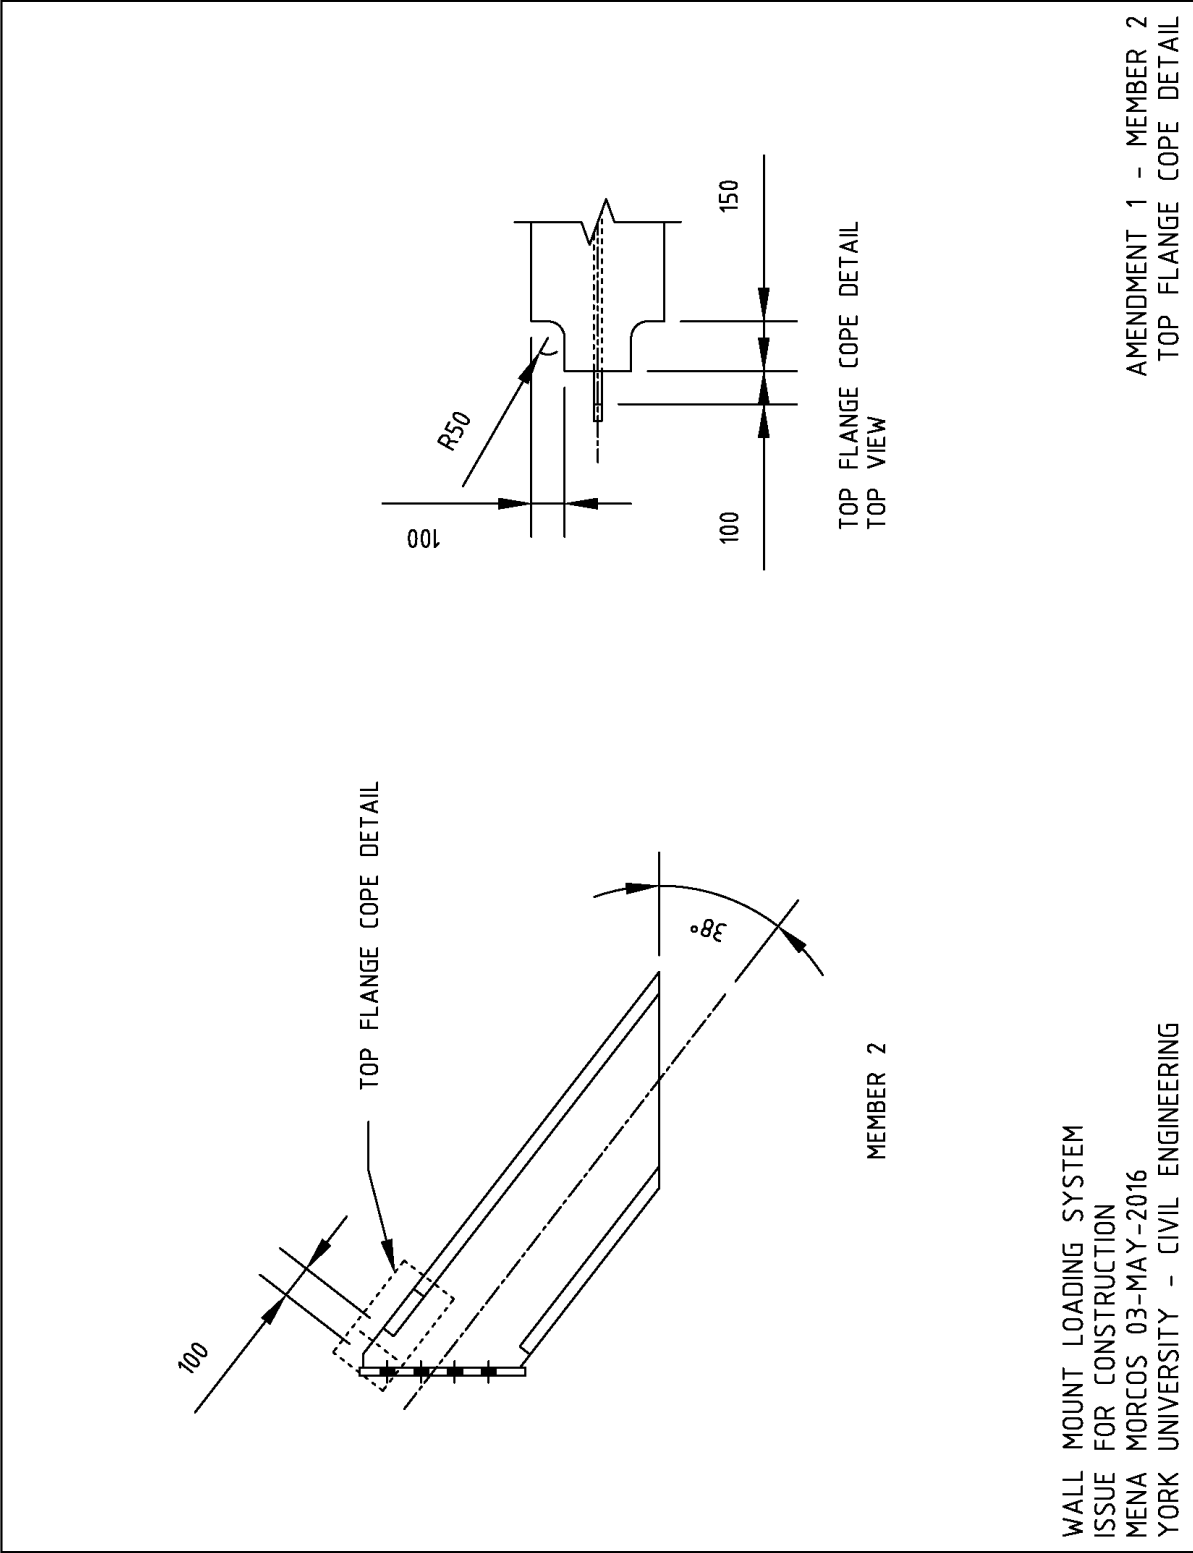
Wall mount loading system design and fabrication drawing – Amendment 1.
